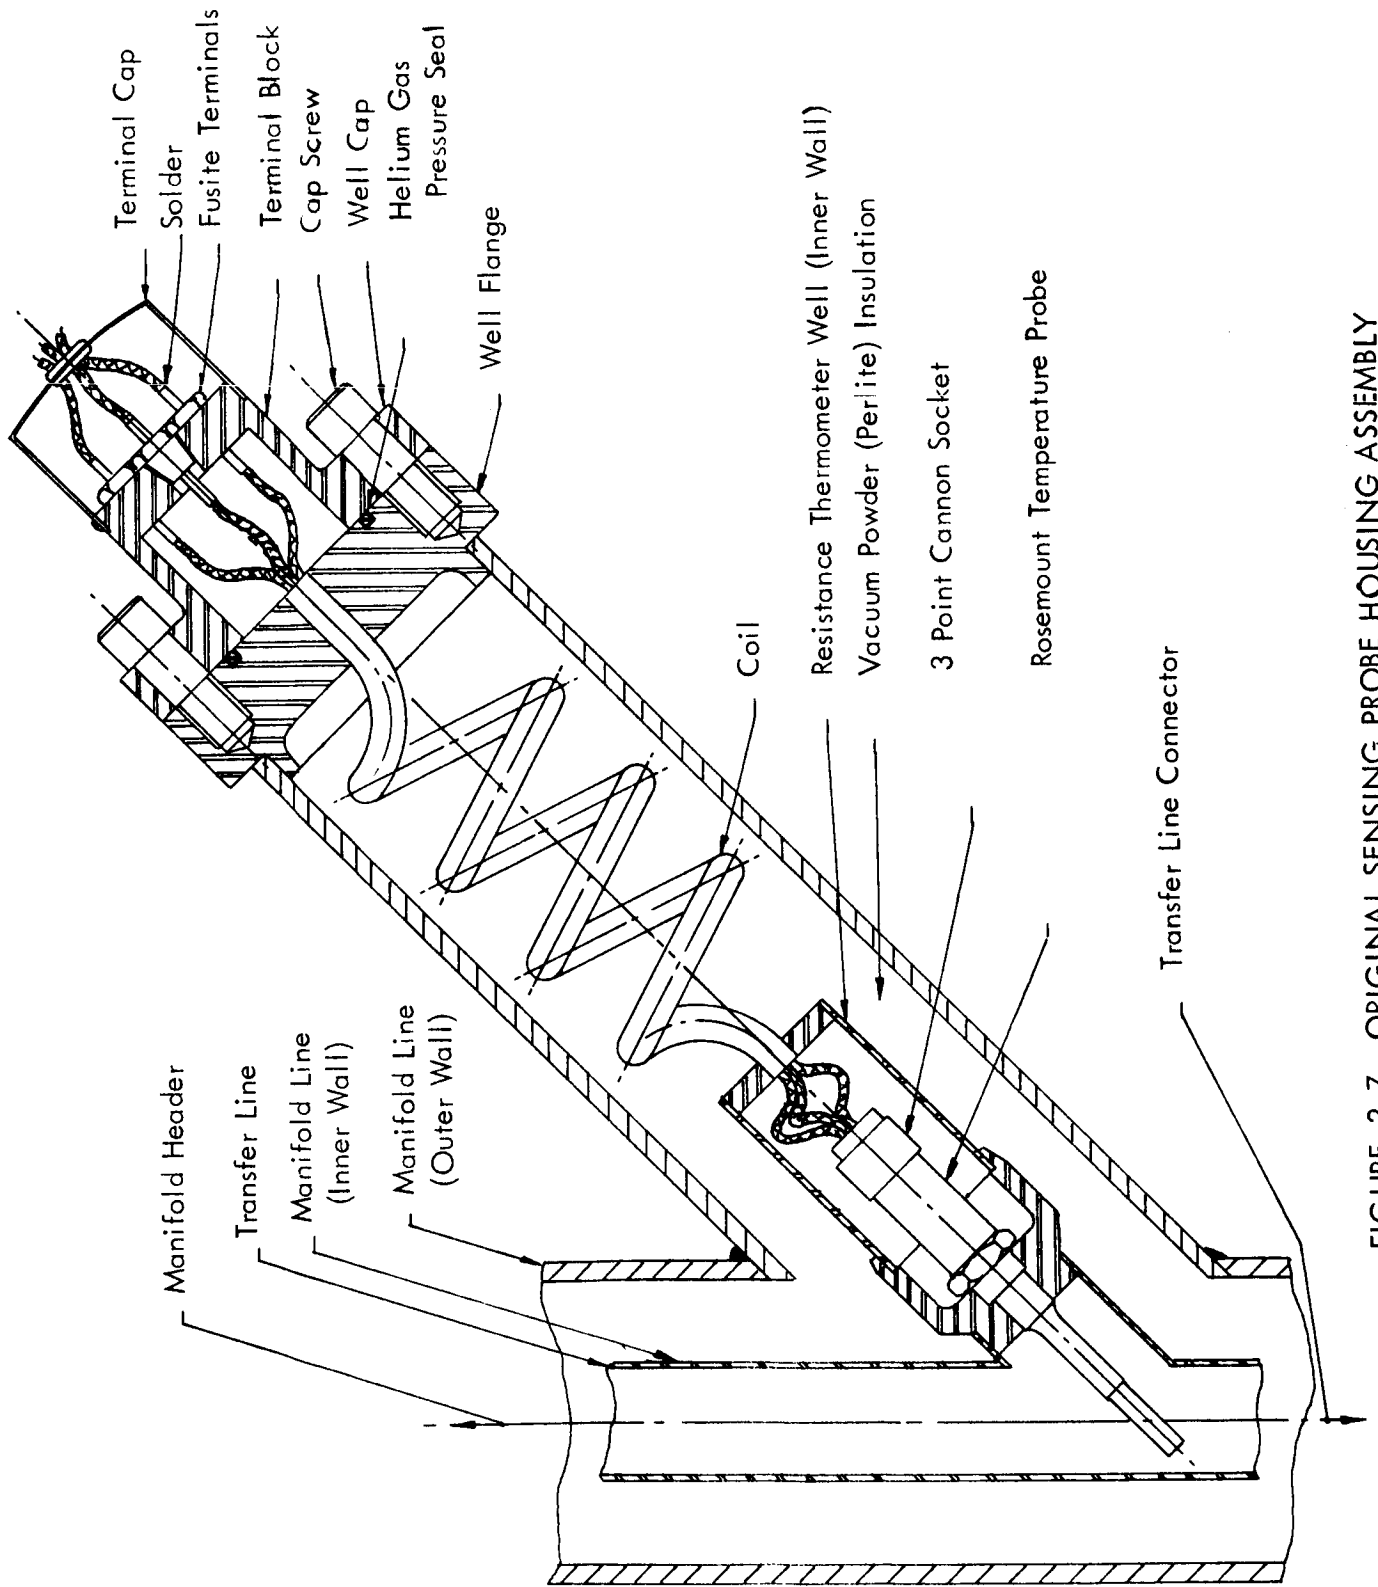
ORIGINAL SENSING PROBE HOUSING ASSEMBLY
